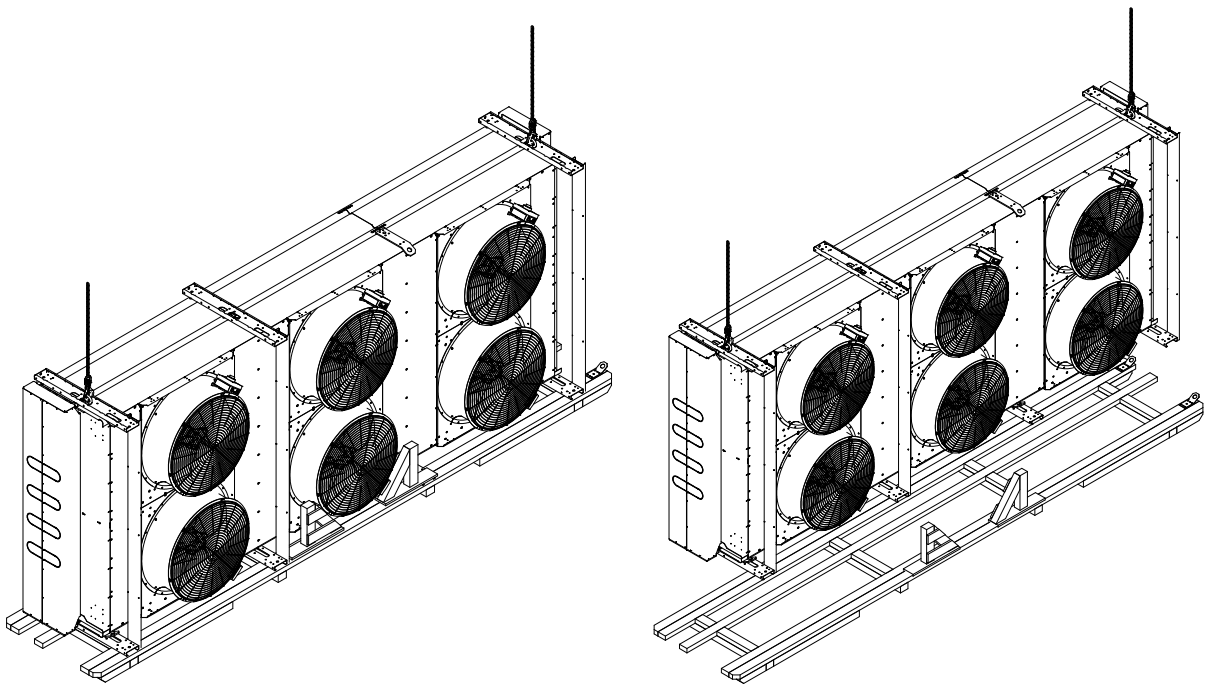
Upper part fastening protection (left) and hardboard coil protection (right)
